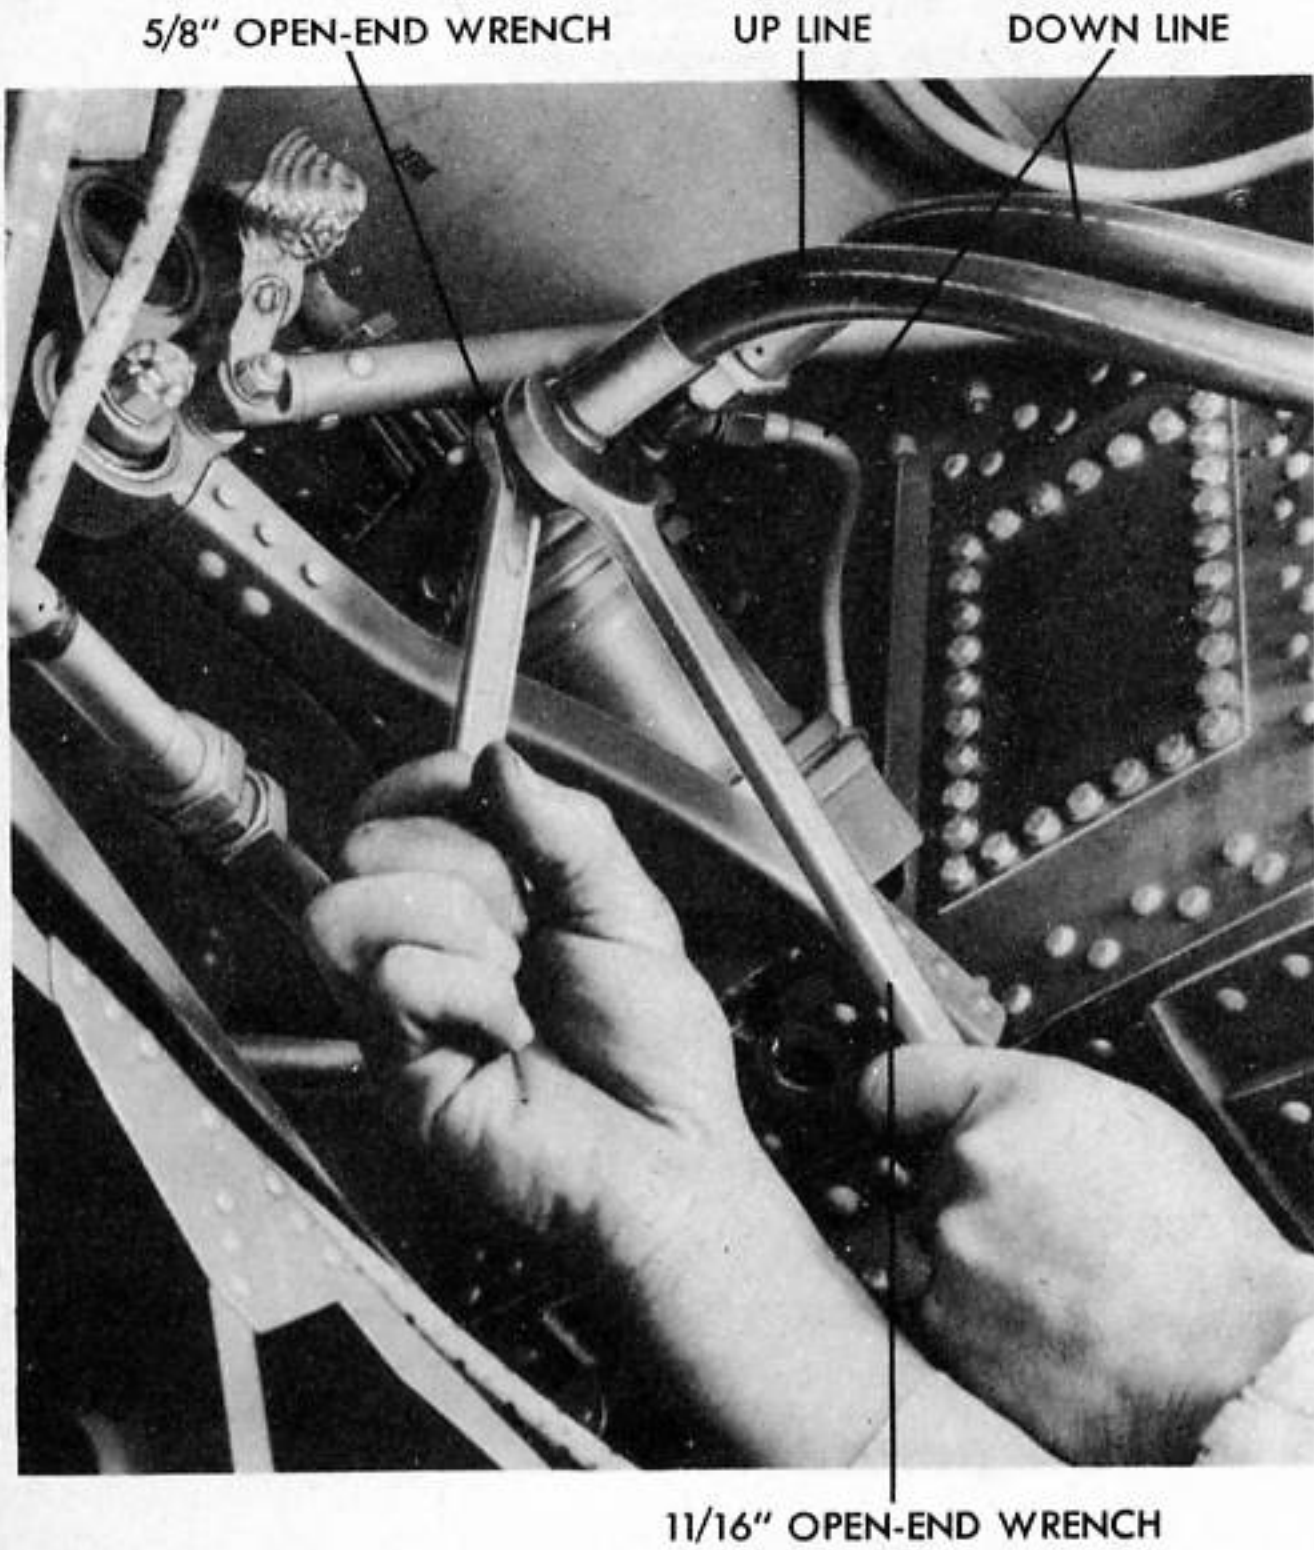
REMOVING OUTBOARD WING FLAP ACTUATING STRUT
